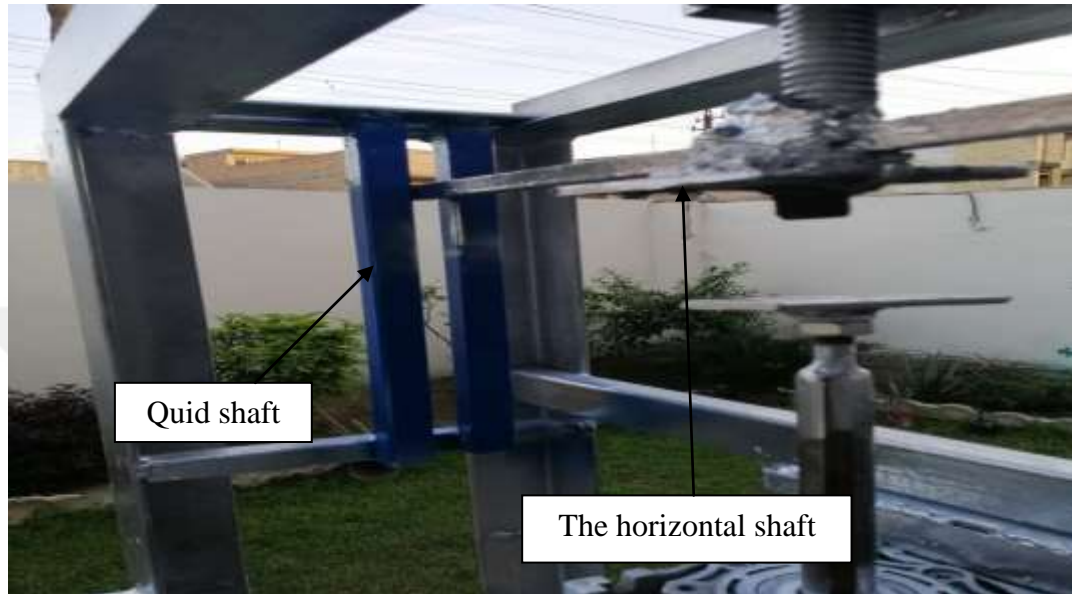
Described the Horizontal Shaft's Movement inside the Quid Steel
